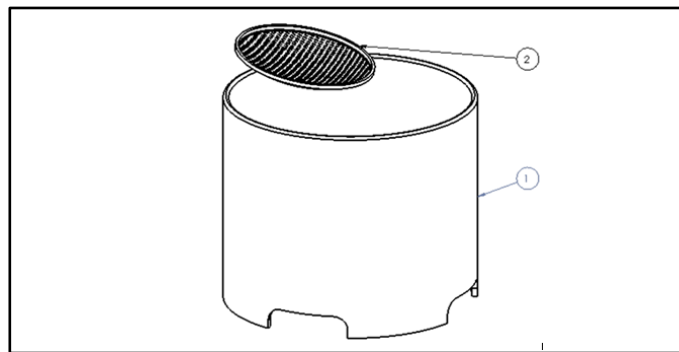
Components of peel separating equipment. The equipment contain two components; sieve and container.
